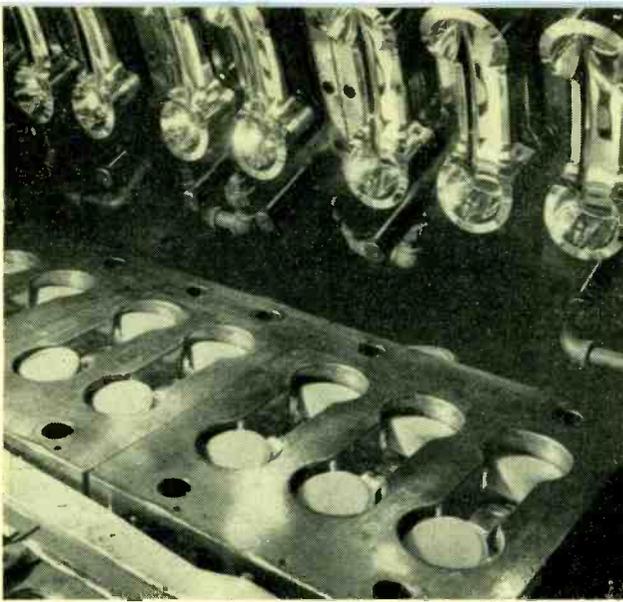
Compression molding eight telephone handsets at a time. Preformed shapes of thermosetting plastic are fed directly to heated metal mold
